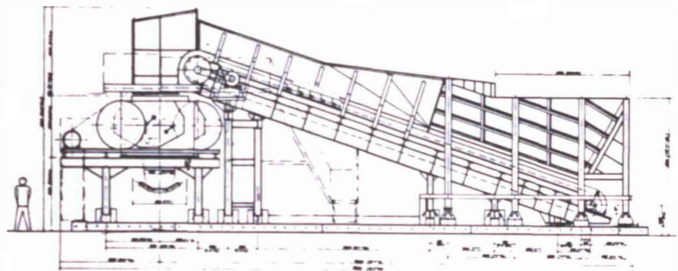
General arrangement drawing of the mobile crushing unit with apron feeder CNA 14/1800 and roller crusher RG 850 x 2000
